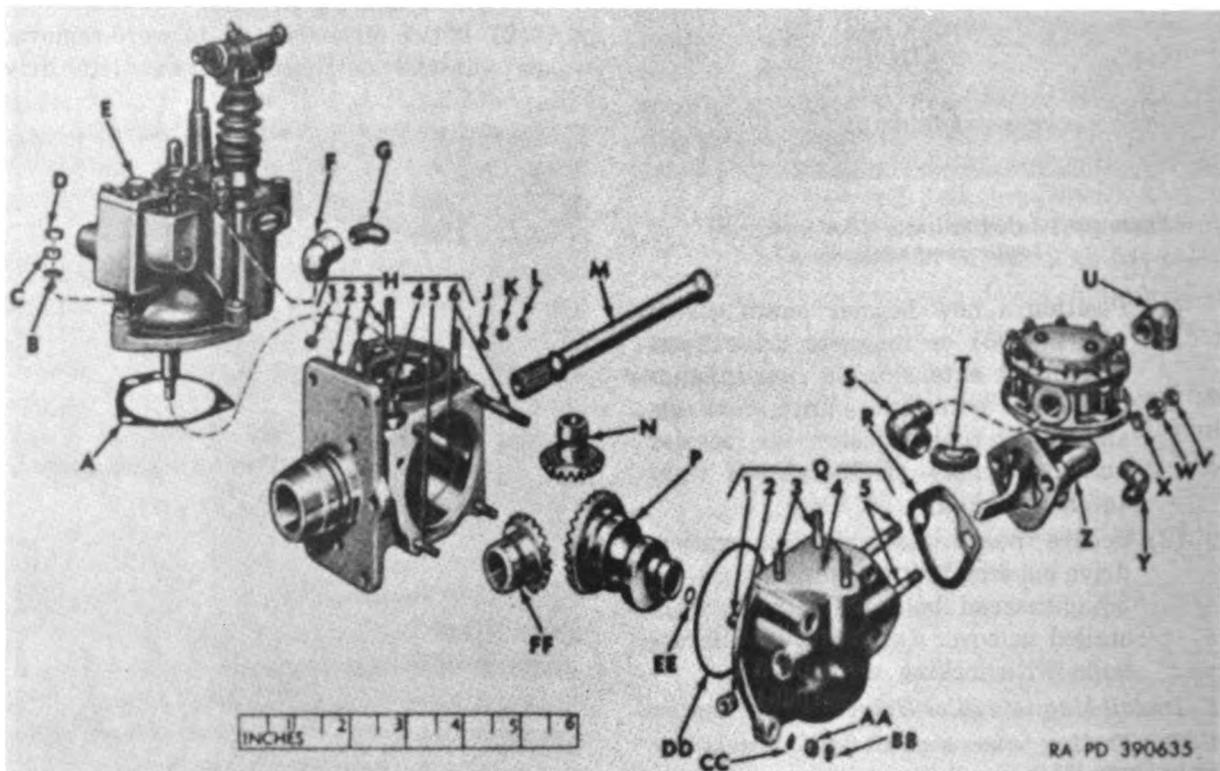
Right camshaft drive housing and governor and fuel pump drives—exploded view.
